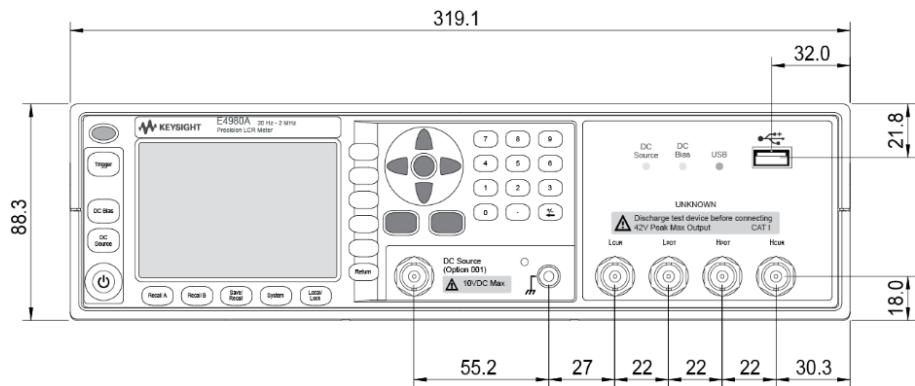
Dimensions (front view, without handle and bumper, in millimeters, nominal)
